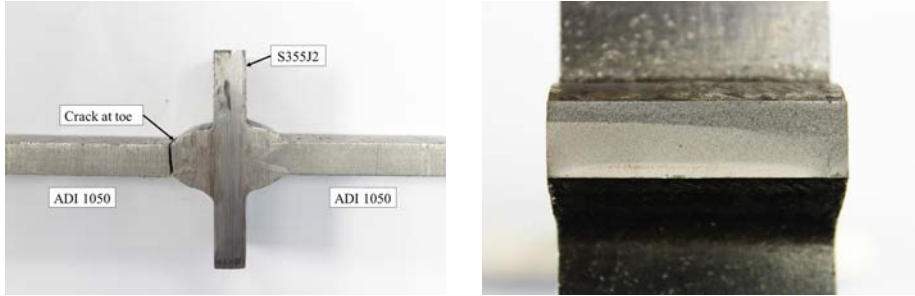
Fracture surfaces of cruciform full penetration K-butt-welded joints: specimen F4-3, as welded, 4PB loading, $R=0.05$, $\Delta\sigma = 191\text{MPa}$, $N_f = 1222986\text{cycles}$
